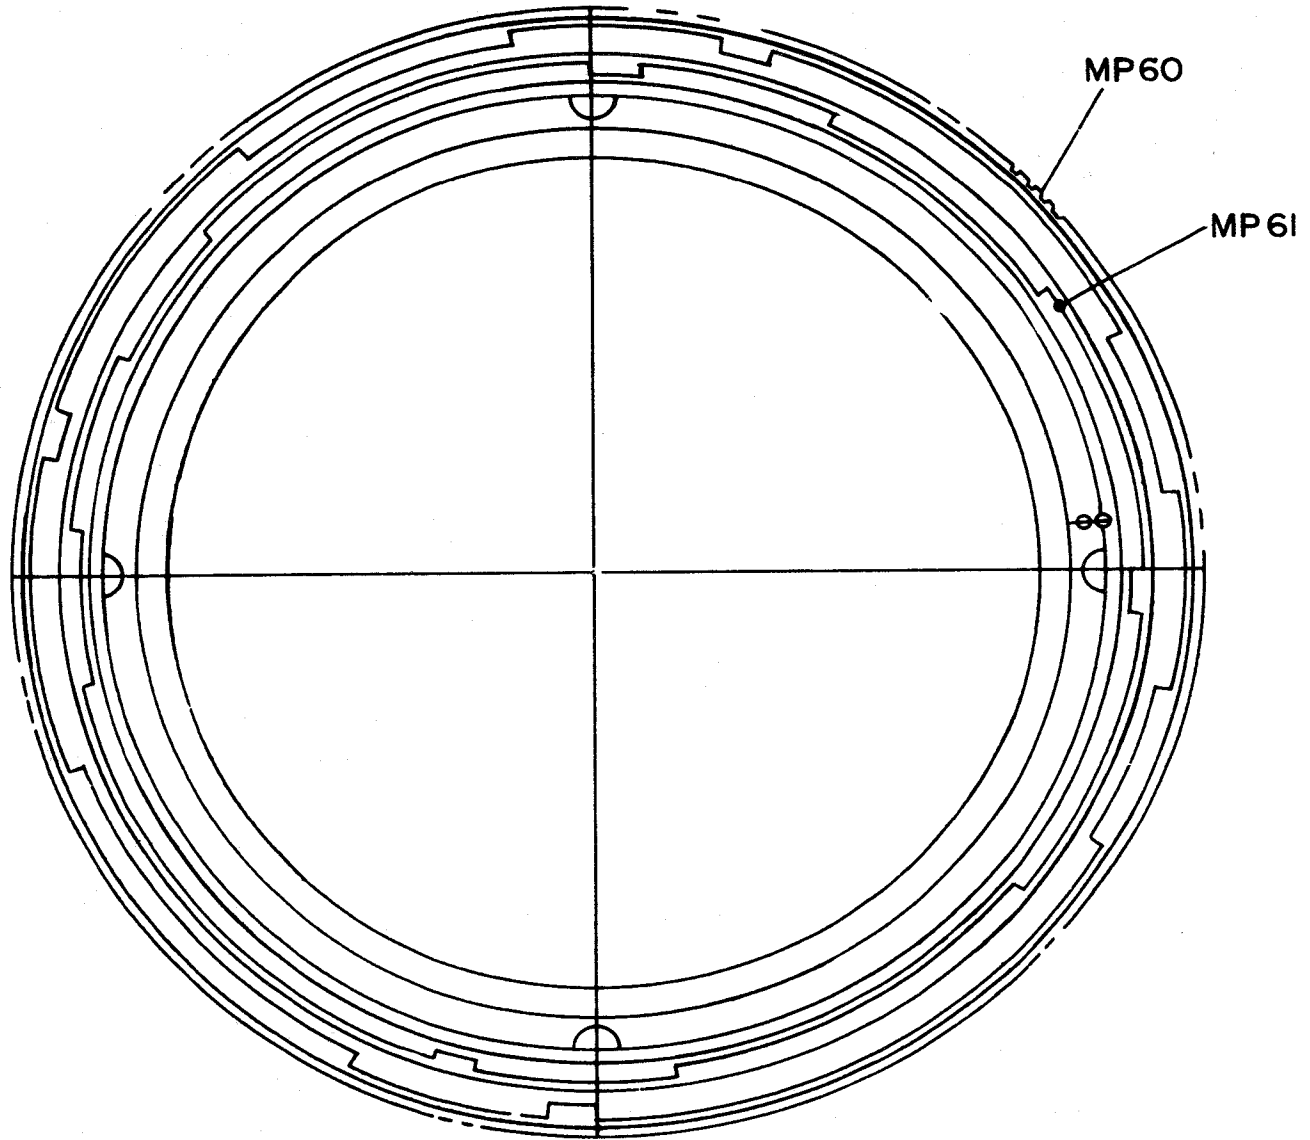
Turret Drive Gear Assembly (P/O A2A4),
